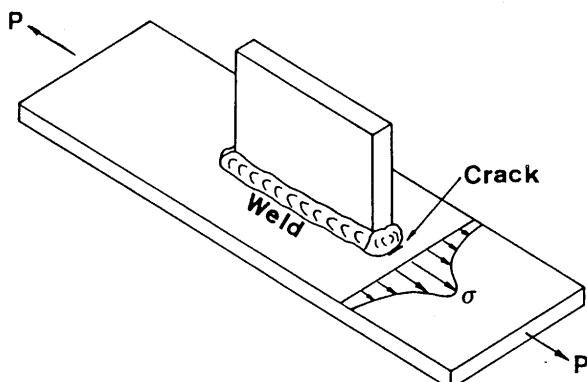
A crack initiating into the weld toe of welded structural members.
